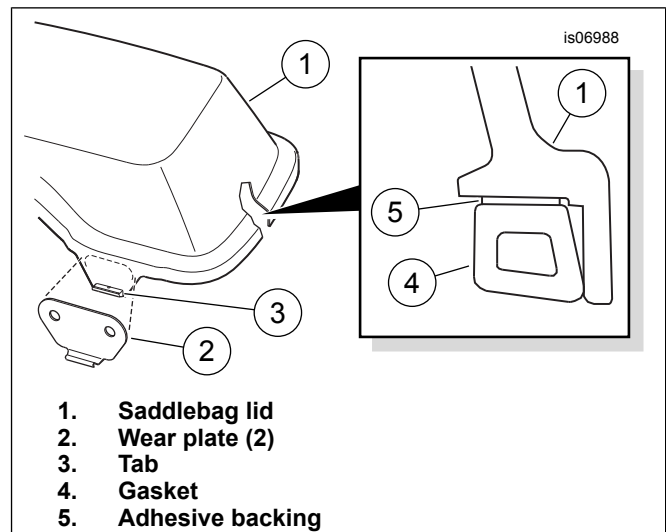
Assemble Wear Plates and Gasket to Saddlebag Lid
